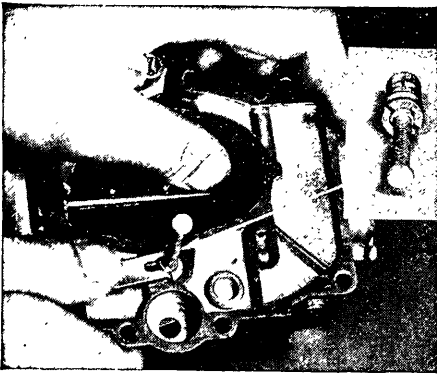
If carburetor is equipped with automatic choke, remove these parts; then remove vacuum piston. (See Automatic Choke chapter)
